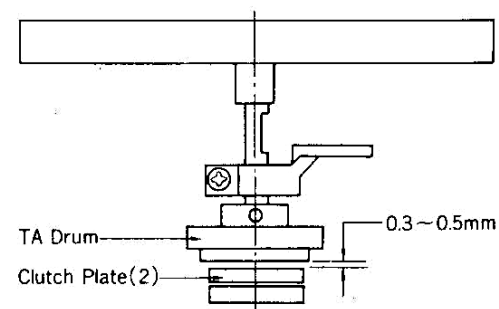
Clearance between TA Drum and Clutch Plate (2)
